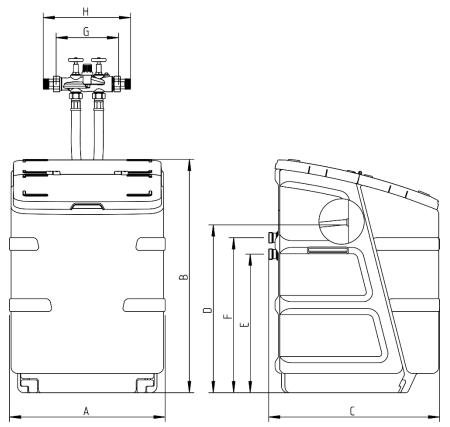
Dimensional drawing of Weichwassermeister GSX
